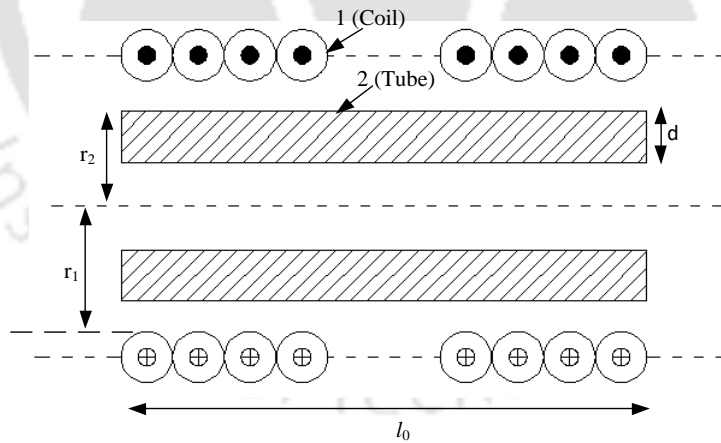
Geometry of coil (1) and the tubular workpiece (2)
